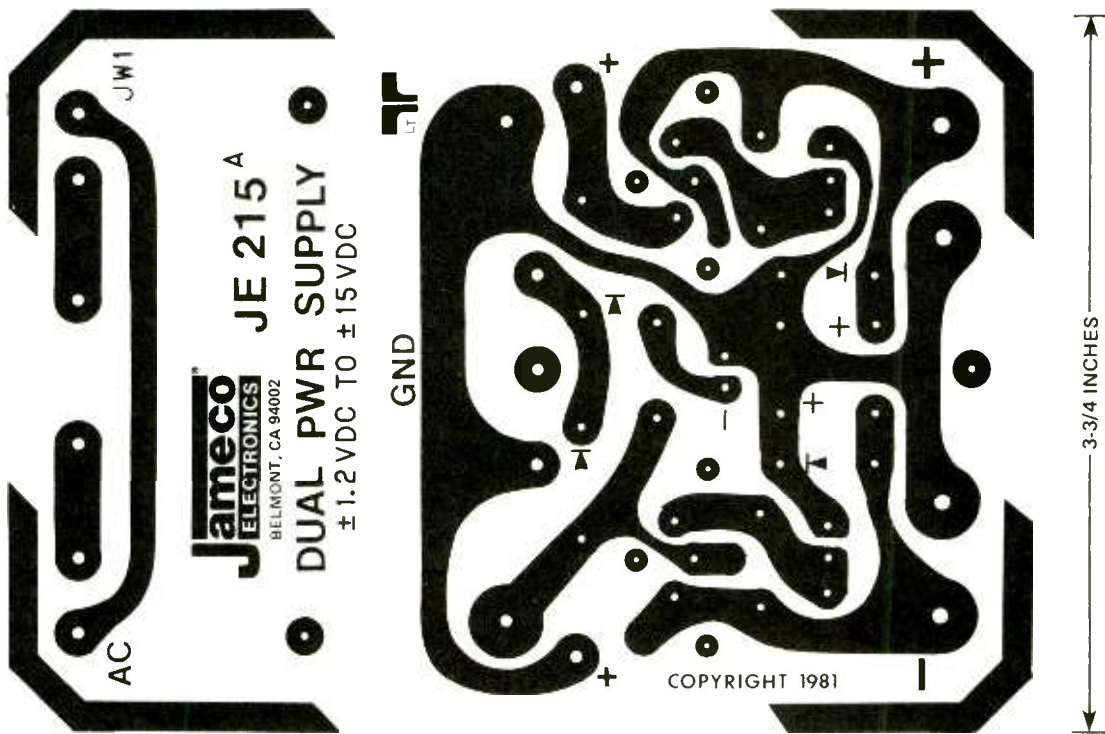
FOIL SIDE PATTERN of the printed-circuit board the author used to assemble this project. The board serves as the chassis, mounting all parts including the power transformer.
